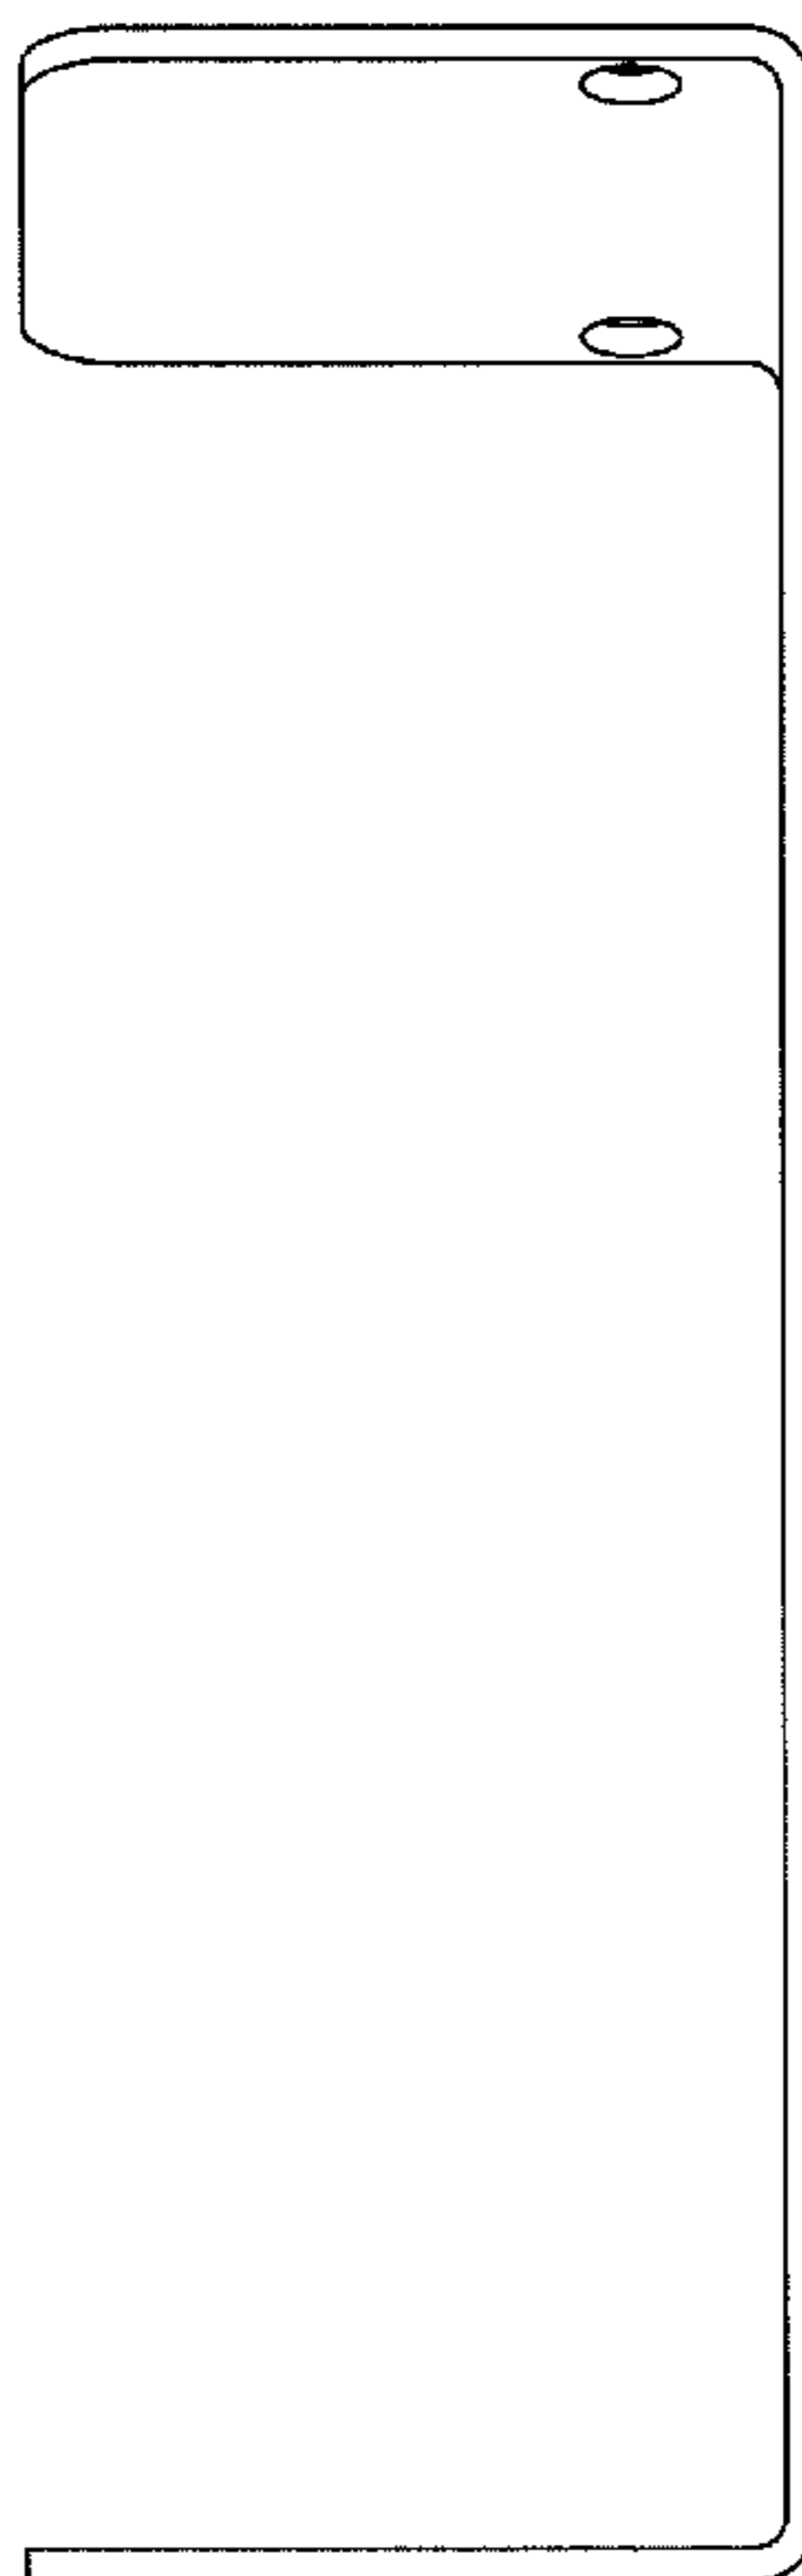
is an end view showing the first side of the bottom surface thereof.
